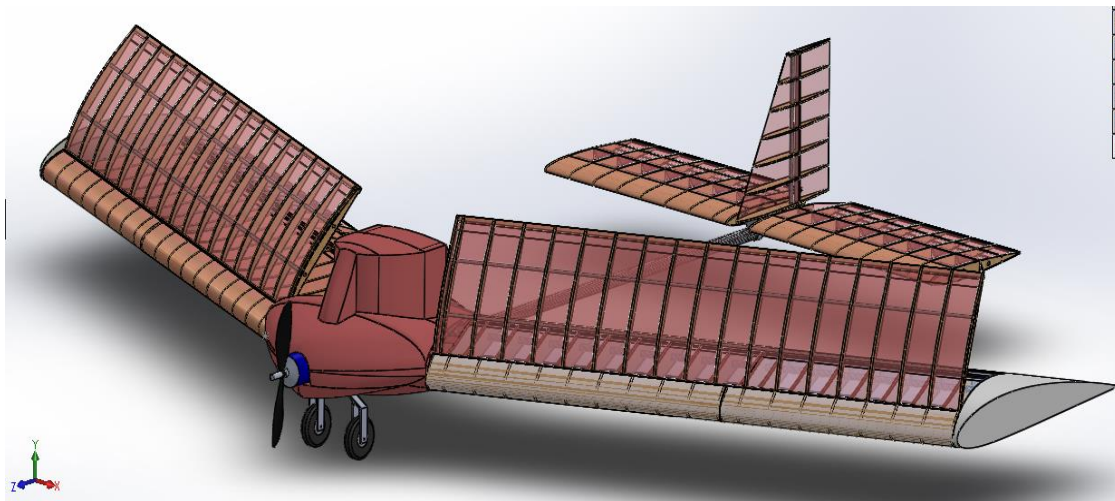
Manufacturing Support Aircraft with Wing Lids Open
